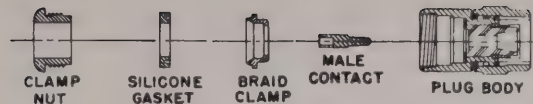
Attaching UG-1041A/U Plug to RG 18/U Cable, Assembly Details
